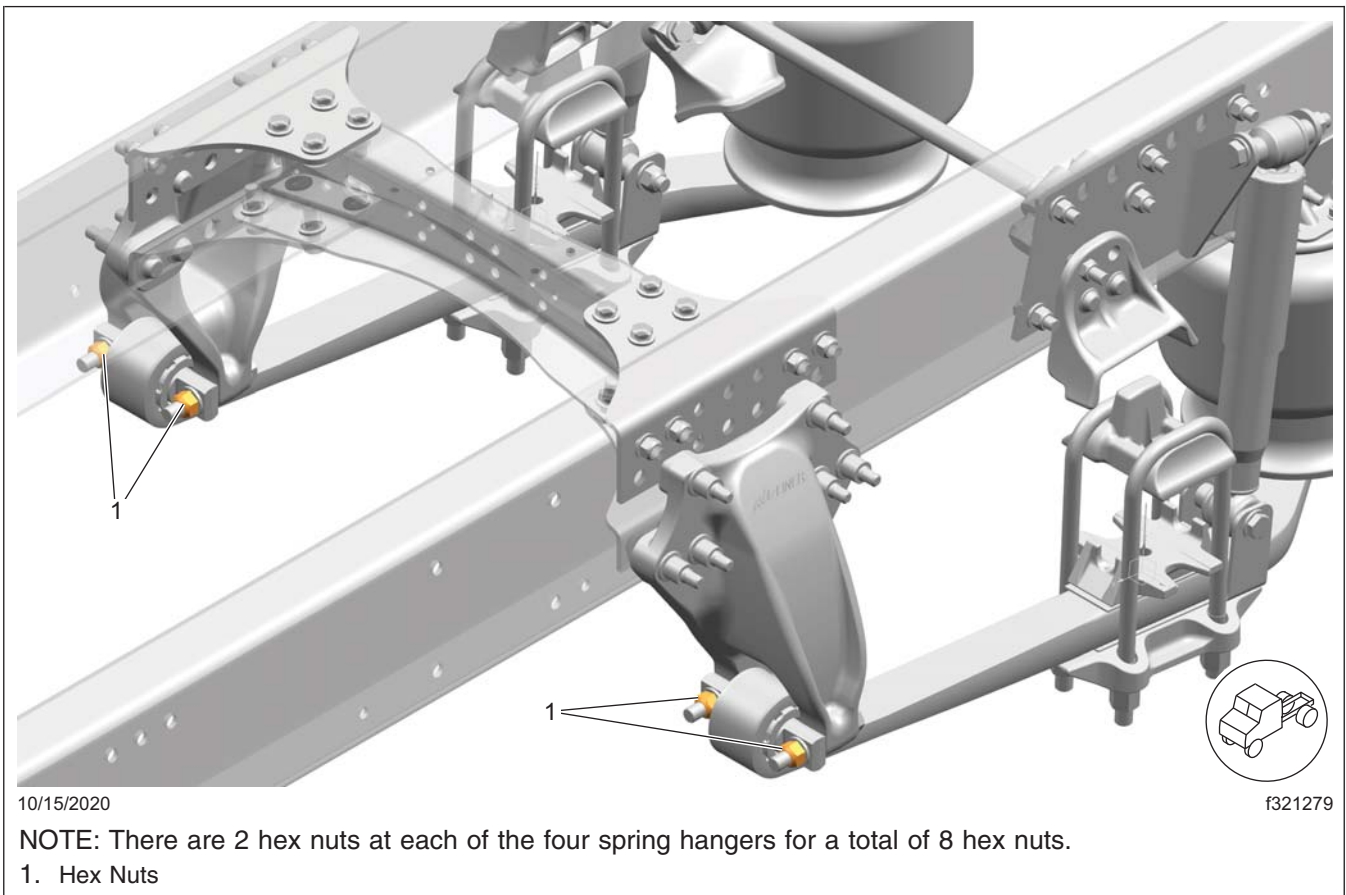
, Drive Axle Leaf Spring Pin Hex Nut Locations
